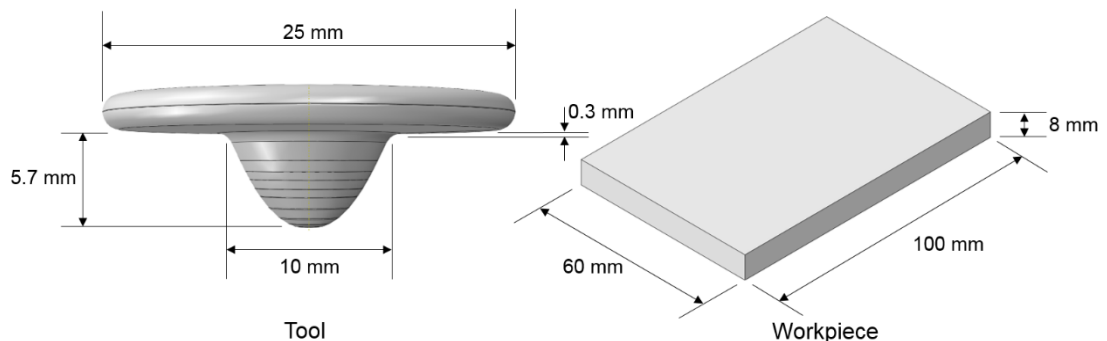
Simplified tool and workpiece geometrical dimensions.
